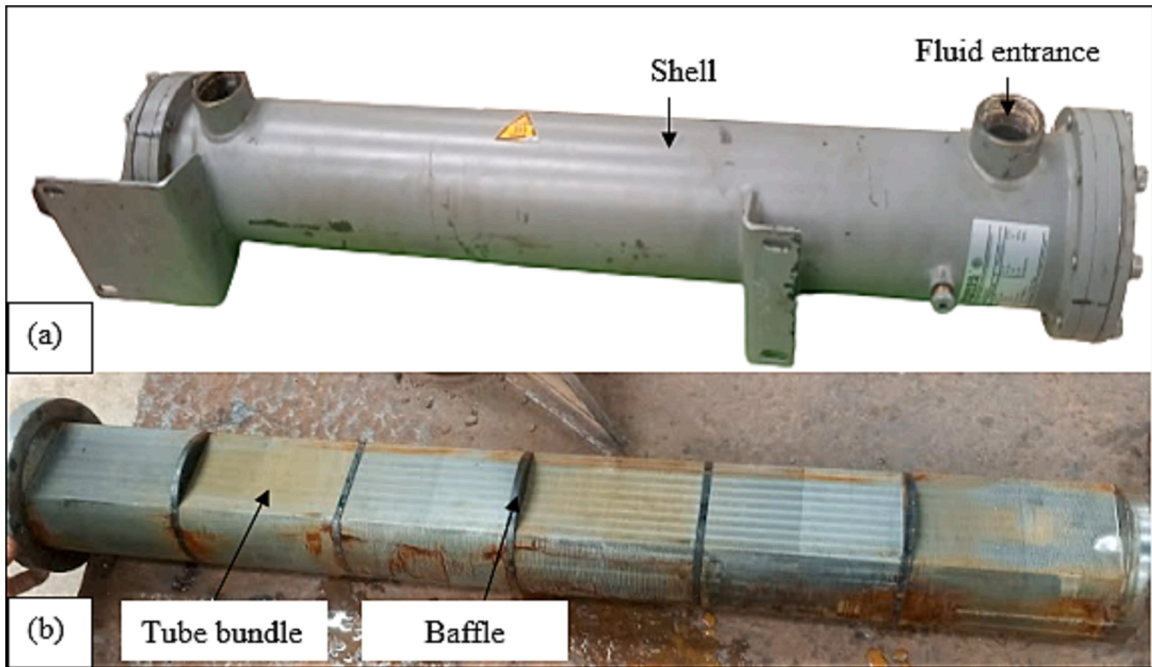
View of the failed shell-and-tube heat exchanger, (a) general view of the exchanger and (b) internal assembly of the tube bundle.
